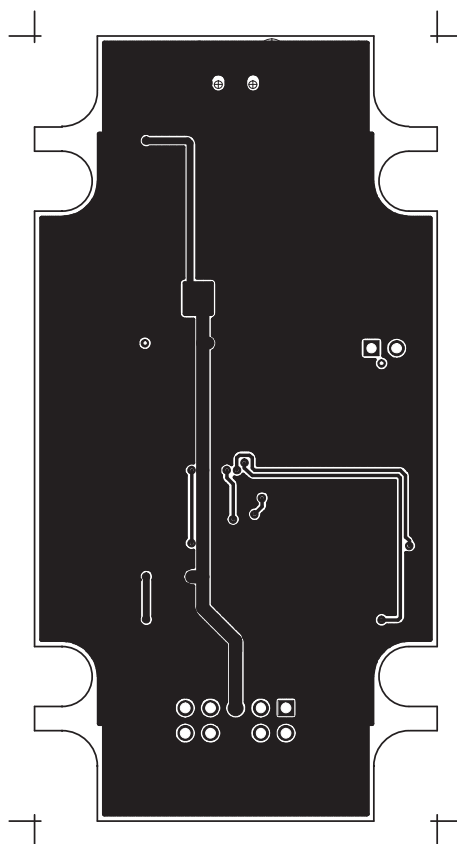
PCB Layout — Bottom L2 (Copper Layer)
